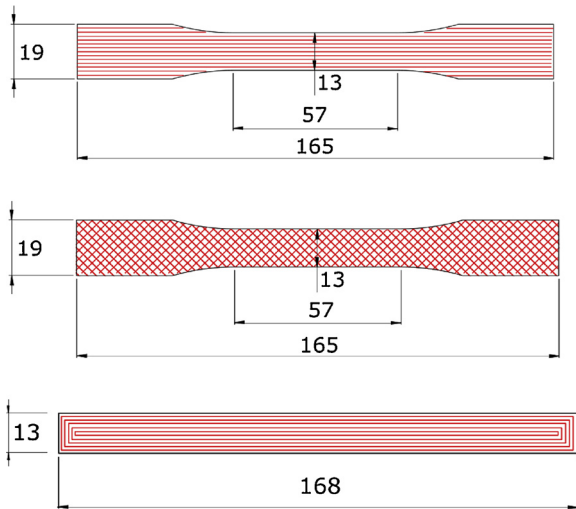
Dog-bone, shear and flexural specimen printing fill patterns and specimen dimensions.
